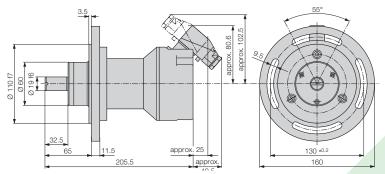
KINAX WT 707 with additional gear, plug-in connector and flange.
